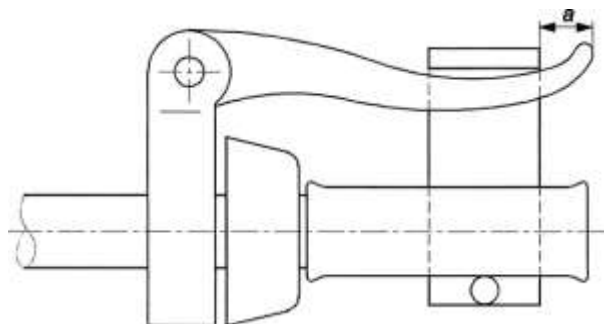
METHOD OF FITTING TO THE GAUGE TO THE BRAKE-LEVER AND HANDLEBAR
